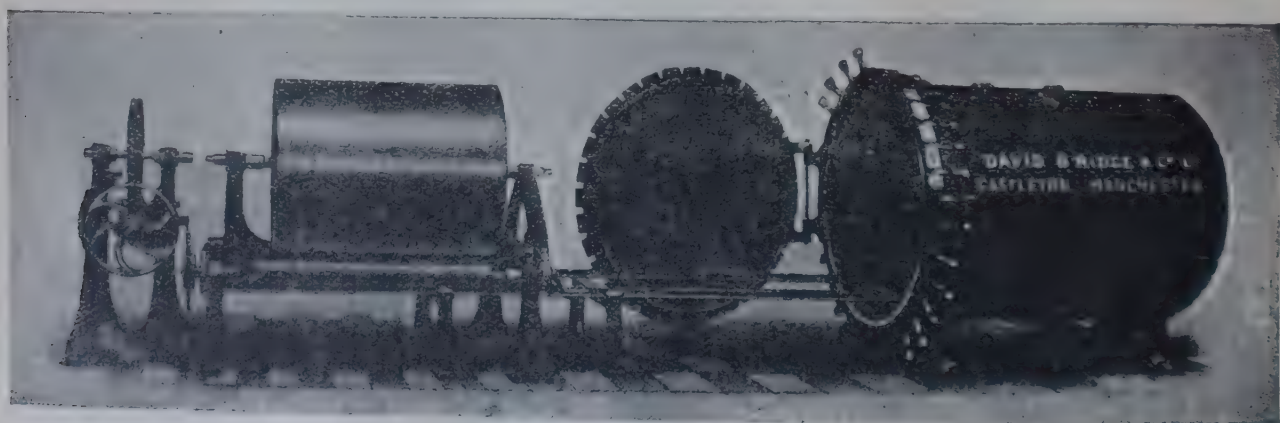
Vulcaniser Open. (David Bridge, Manchester.)
